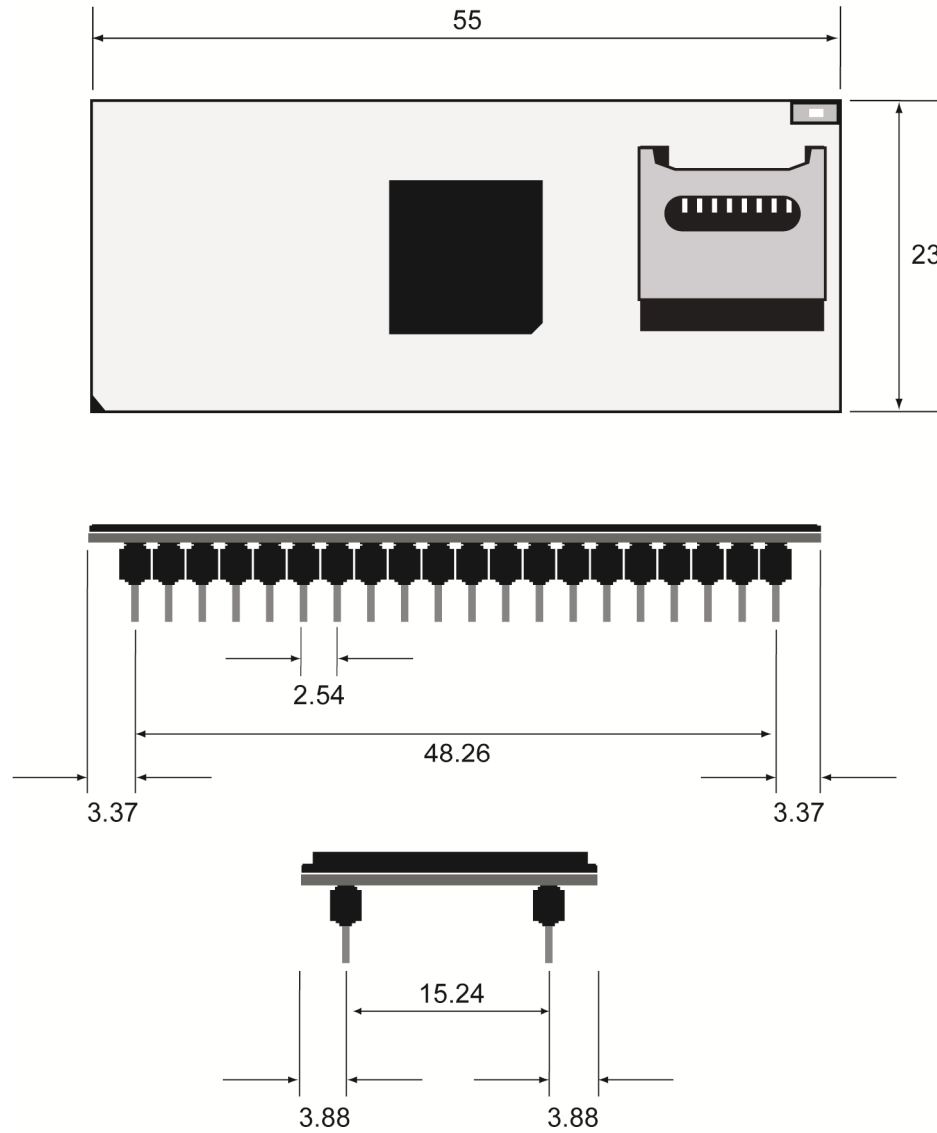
Mechanical dimensions of DIL/NetPC DNP/8331
